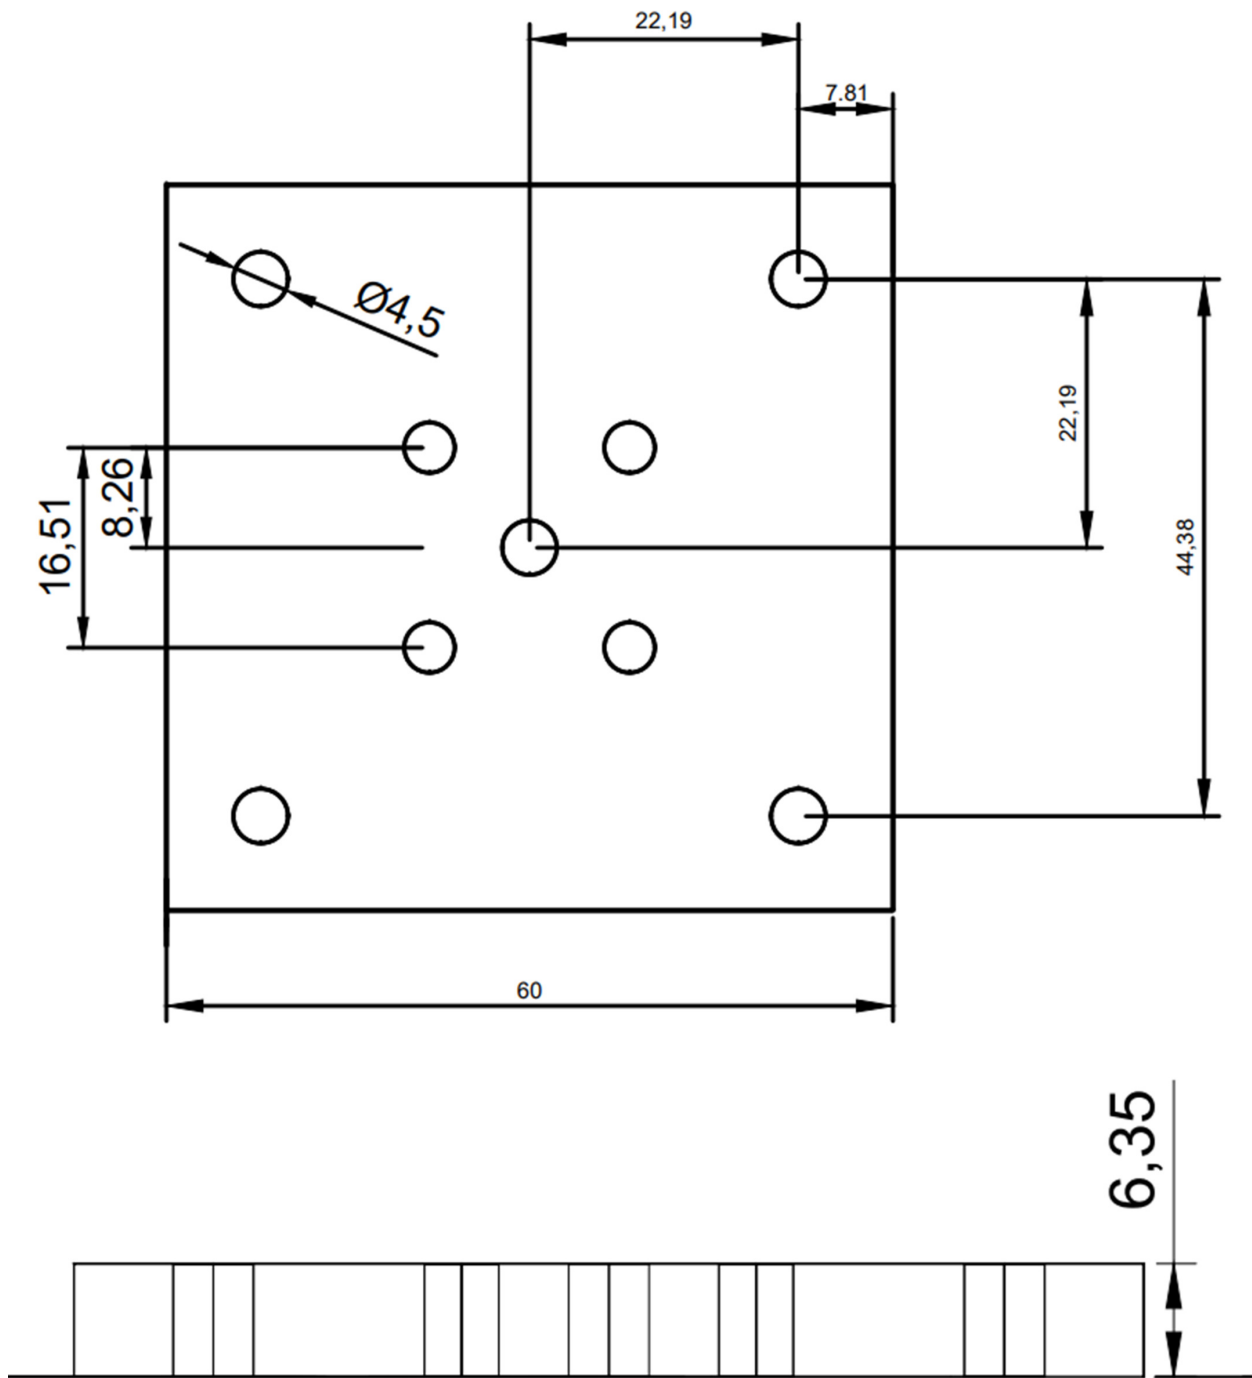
Updated CAD design for top piece of bonding apparatus with 5 plungers. Sizes are in mm.
